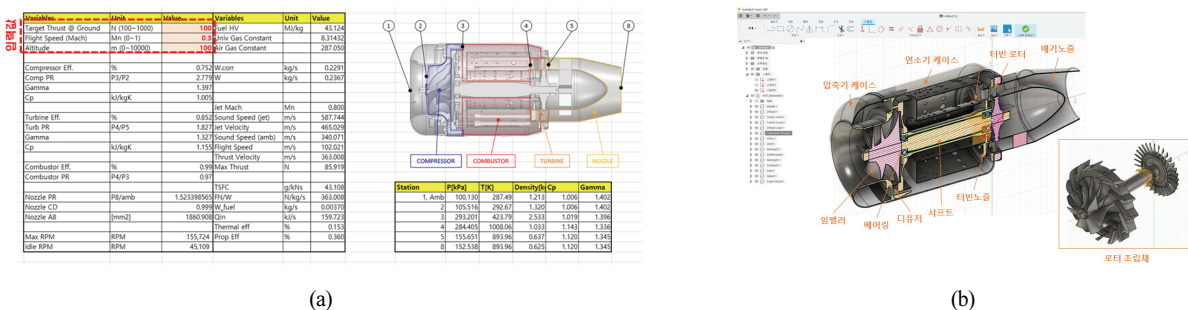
(a) Micro gas turbine sizing and performance analysis tool and (b) 3D CAD generator⁽²⁾
